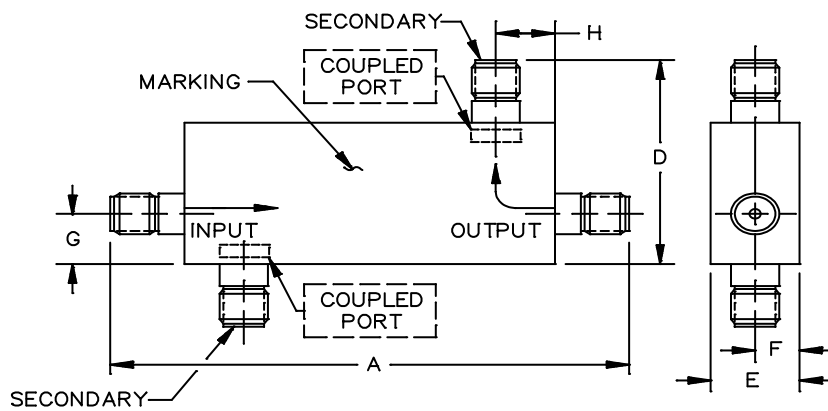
Dimensions and configuration for part number: M15370/3-005.
